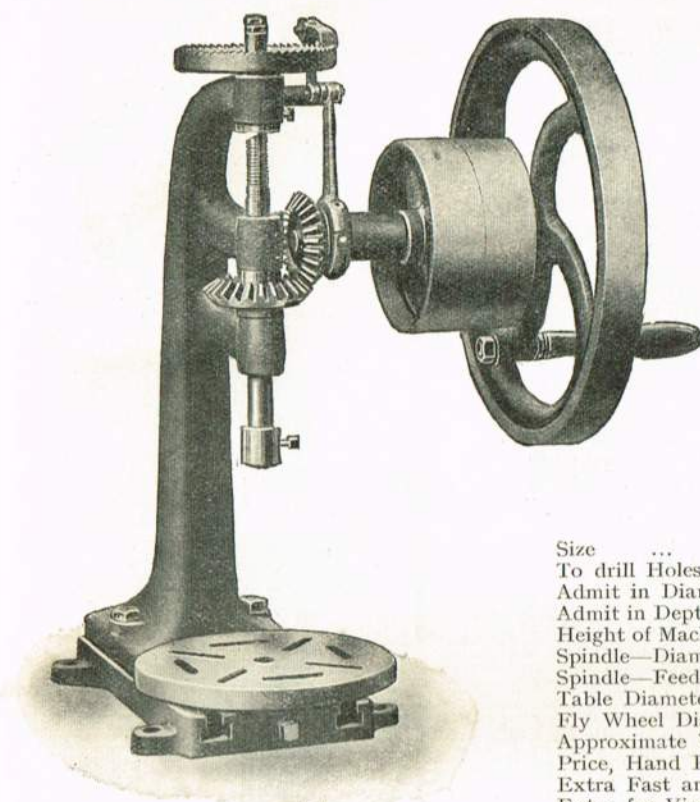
HEAVY PATTERN HAND OR POWER DRILLING MACHINES.
